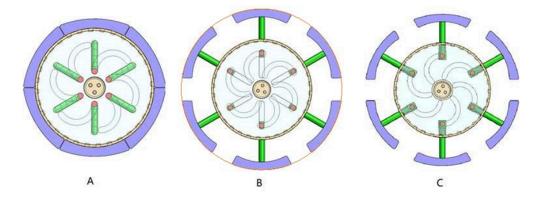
Expanding Pulley Mechanism in Expansion [24]
